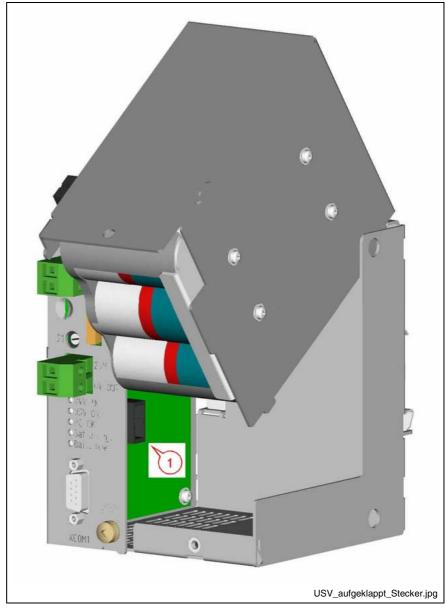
Swivel out the cover, unlock and unplug the connector (1).
